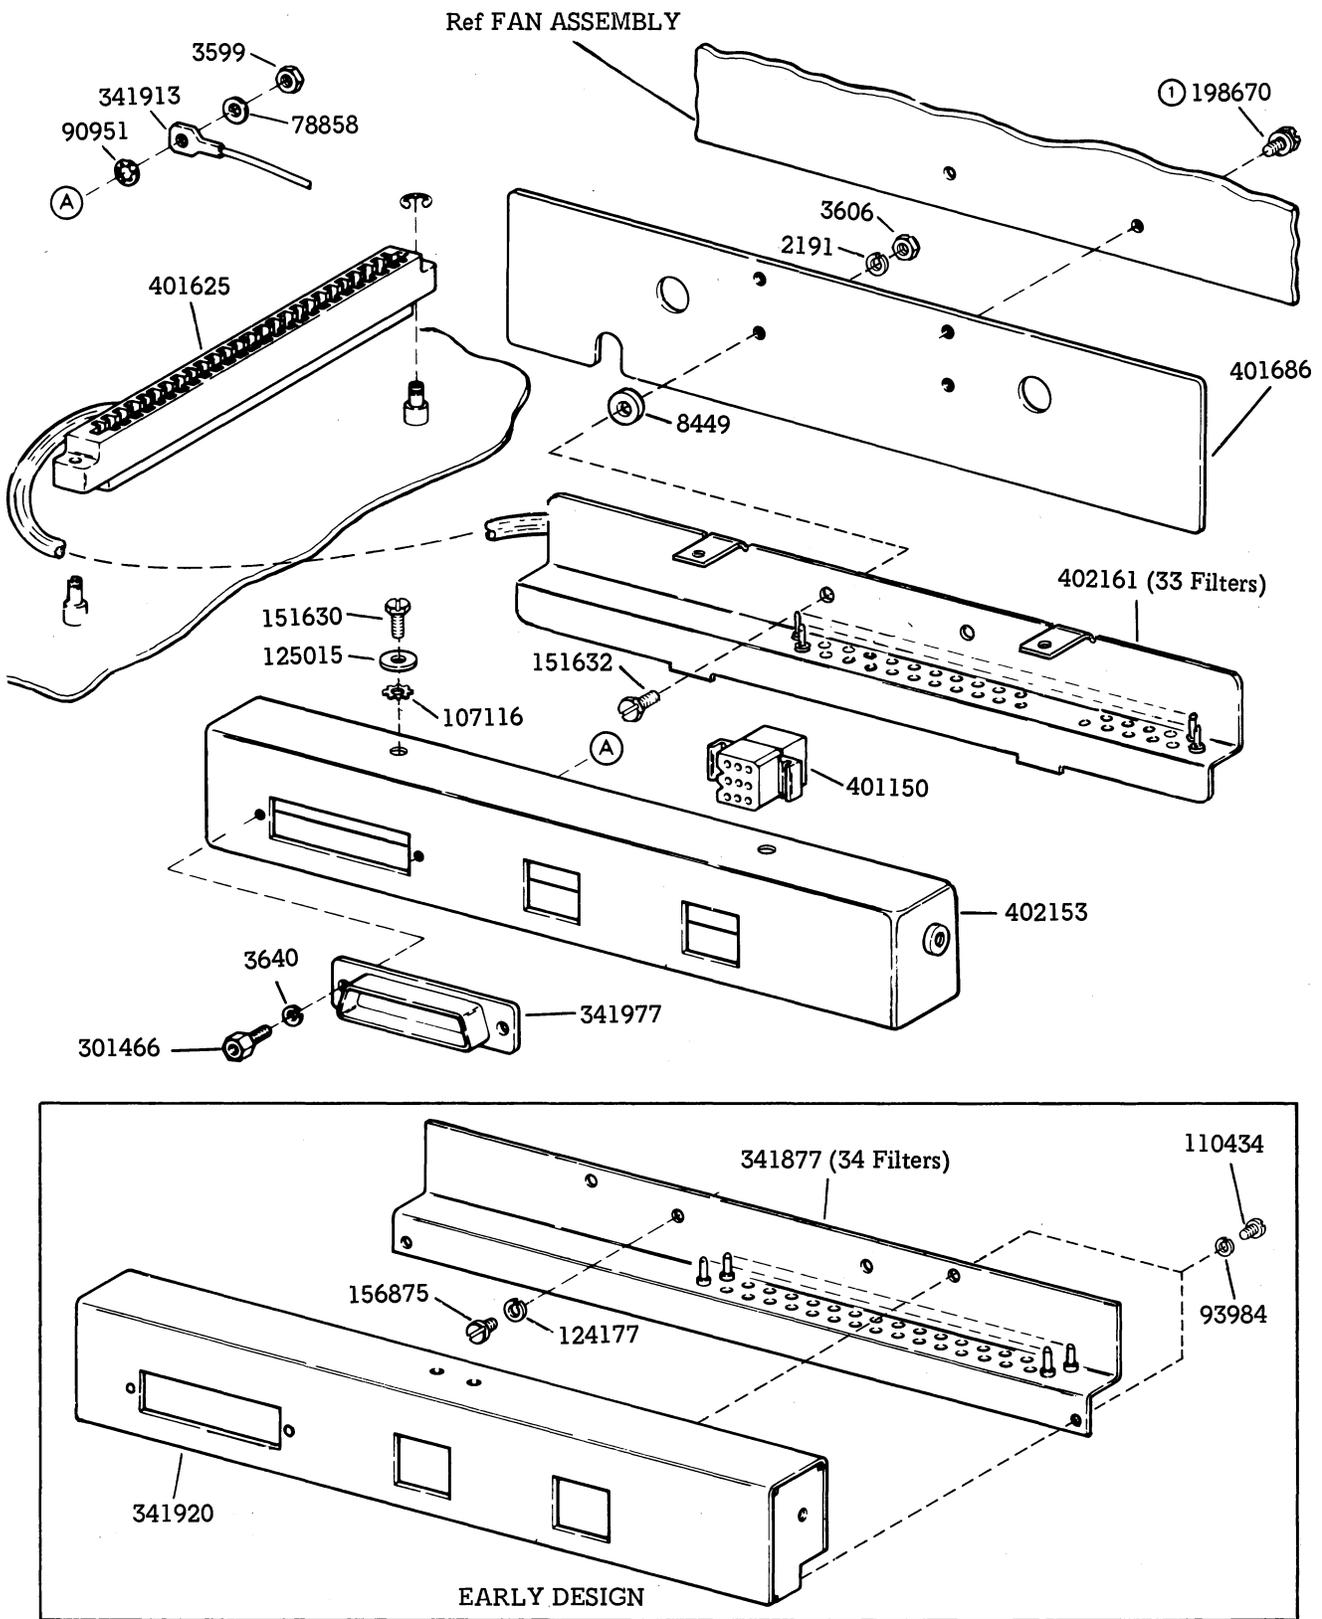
KDP Module Assembly for 40CAB901/AG Cabinet
